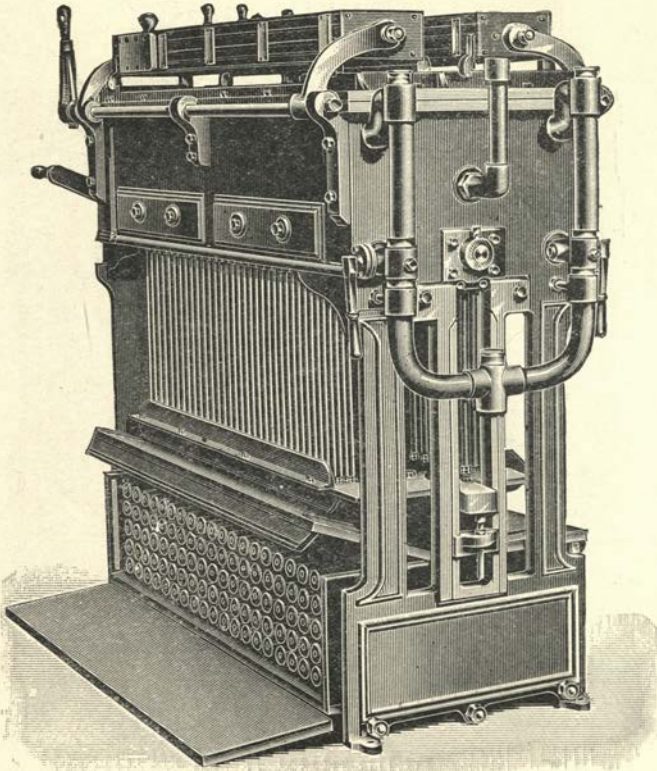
Cowles' Candle Moulding Machine (End Elevation).
